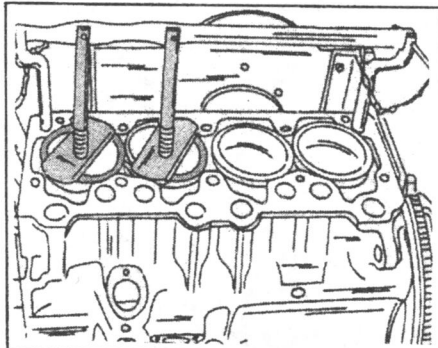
Special tools to push the cylinder liners in position, compressing the seals/shims. The exact protrusion can only be established with the liners under pressure.
